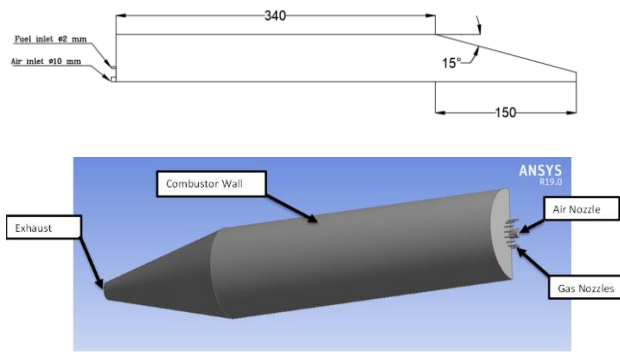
Detailed dimensions of the combustor with exhaust section and 3D configuration
